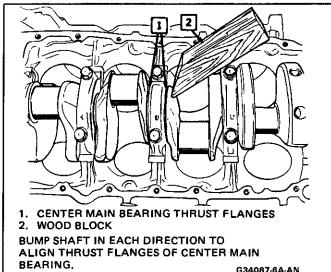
Seating the Crankshaft Thrust Bearing (Typical V Engine)
